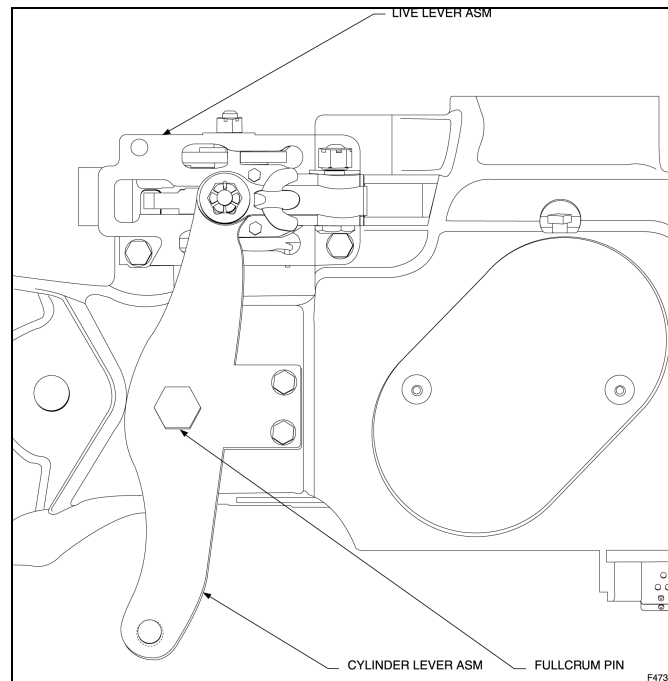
Application of Brake Cylinder Lever Cross-Over Assembly 47360
